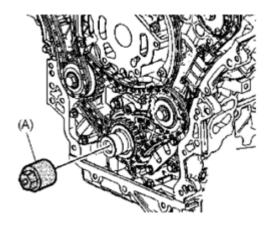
Identifying Crankshaft Rotation Socket Courtesy of SUZUKI OF AMERICA CORP.
